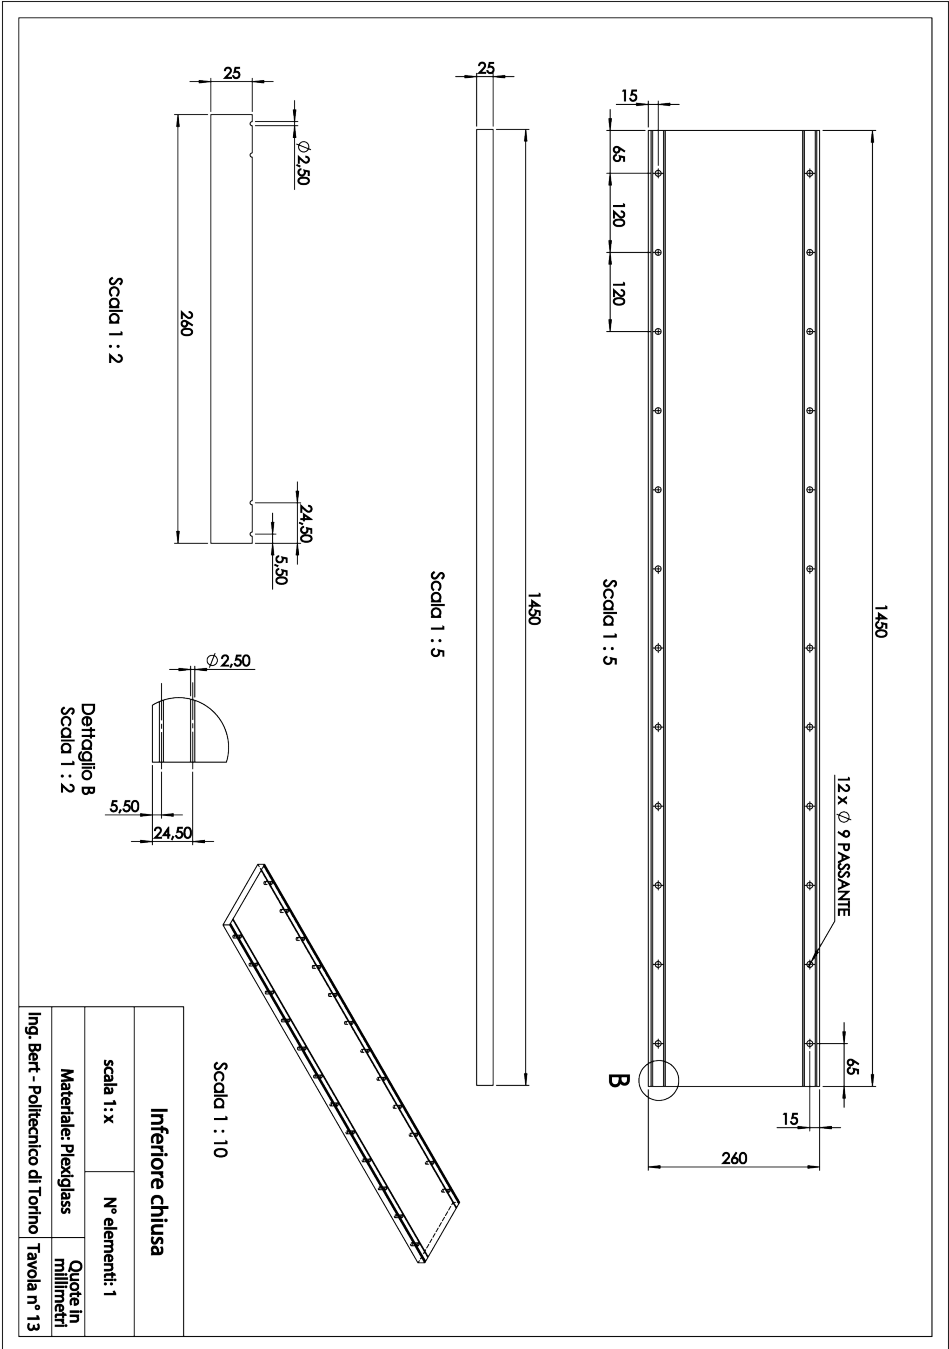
Lower part of the test section for smooth-wall impermeable tests.
